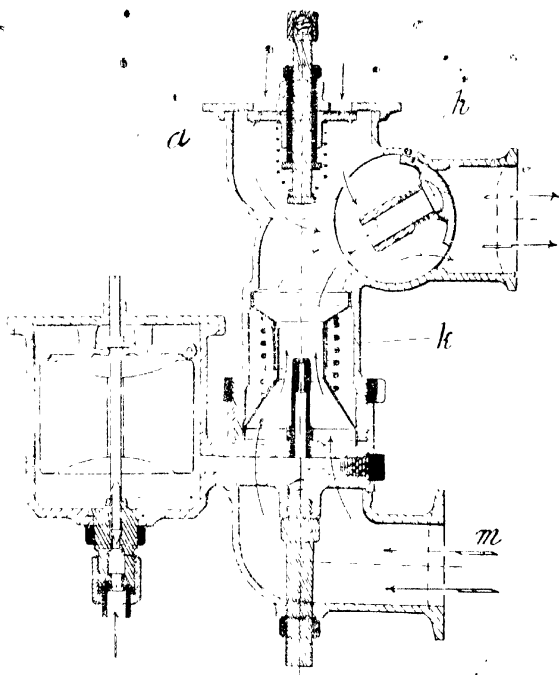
Single jet automatic carburettor with spring-controlled supplementary jet disc and Corliss throttle. Brown-Barlow.
